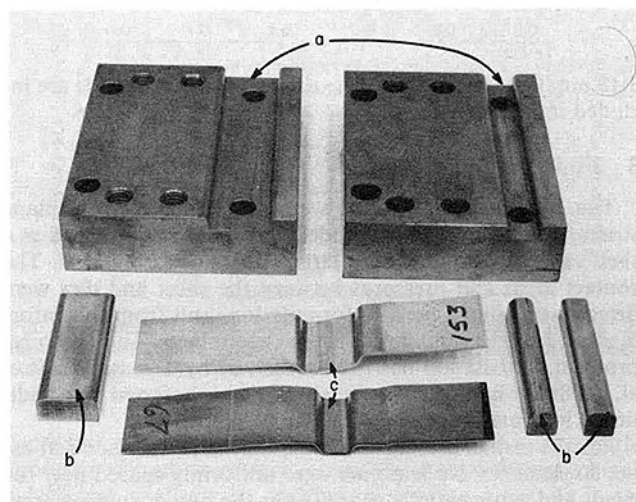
Various drawbeads and deformed samples: (a) female beads, (b) male beads, (c) aluminum and steel samples
